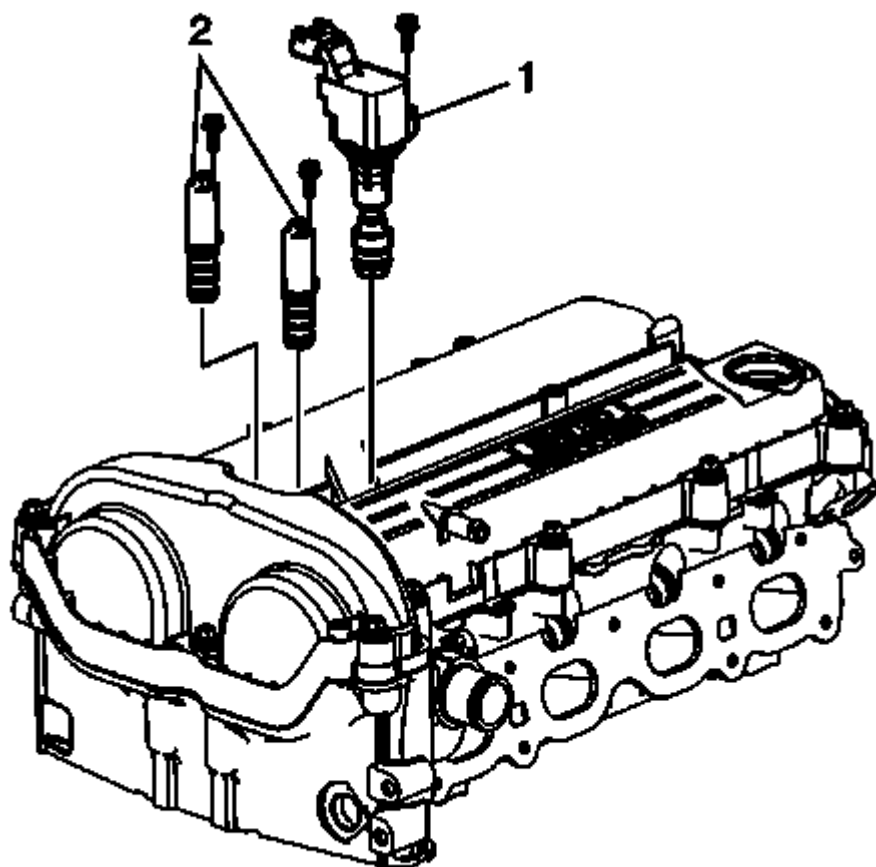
View Of Ignition Coil And Camshaft Position Actuator Solenoid Valves
